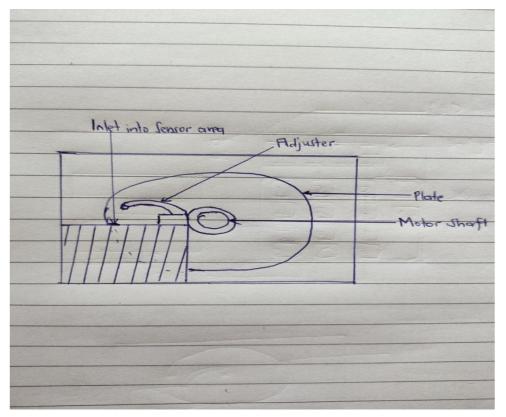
This is a sketch from above showing the plate, motor shaft, and the adjuster.
